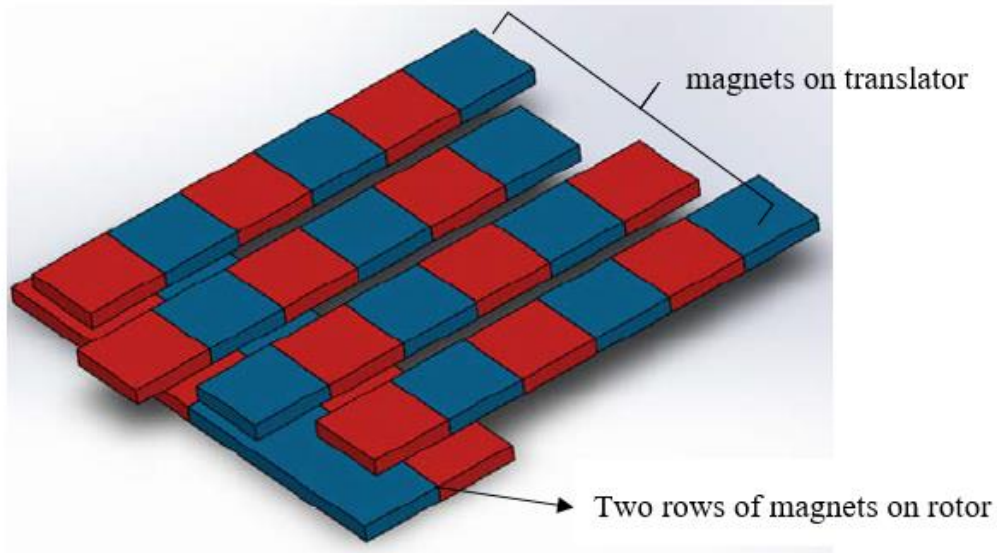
6. Unrolled cylindrical magnetic gear without I-cores.
